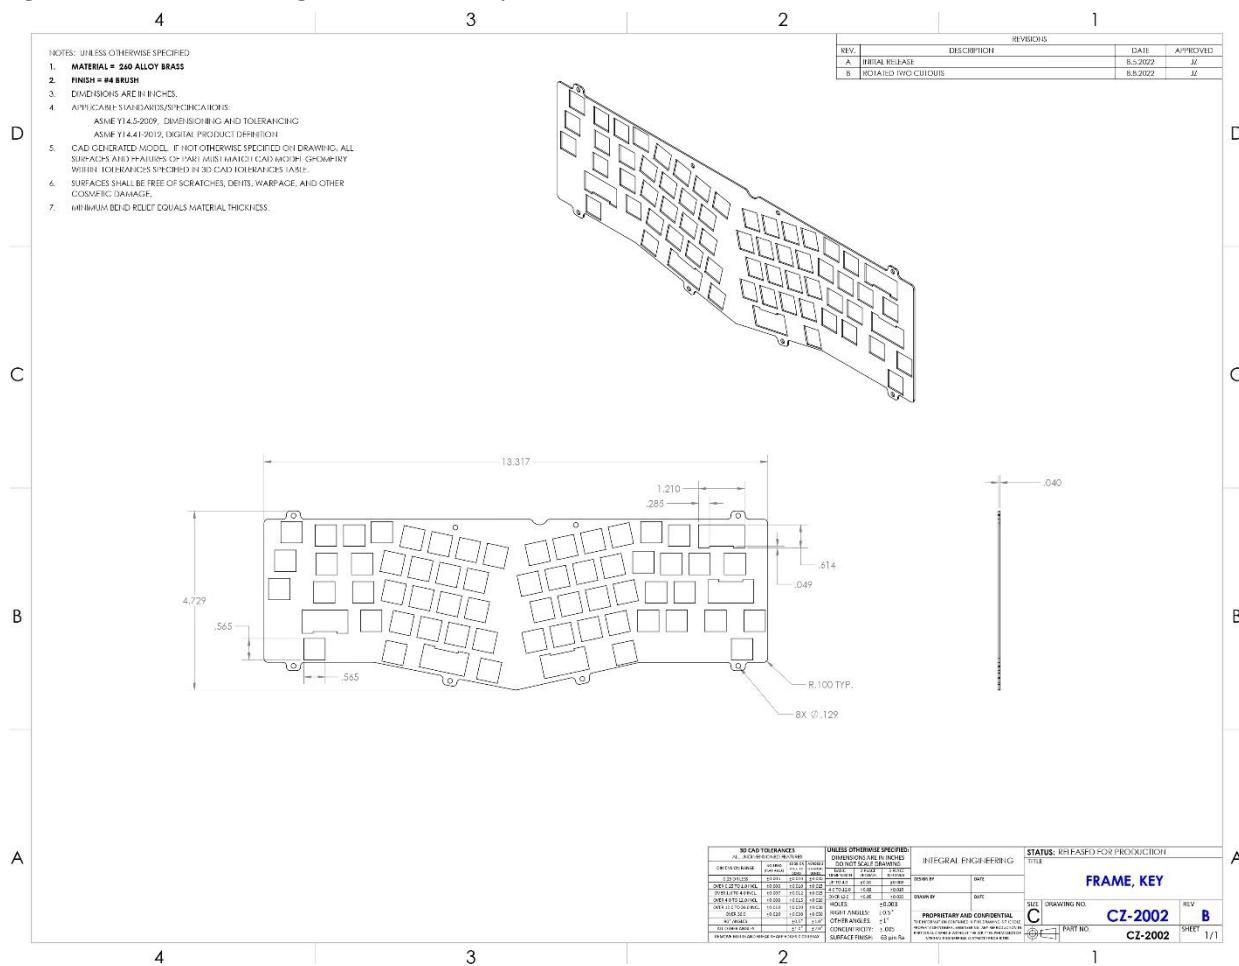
2D CAD drawing for CZ-2002 (Plate).
